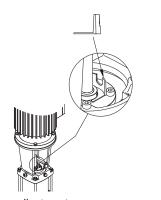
Coupling adjustment CR(N) 32, 45, 64, 90, 120, and 150
